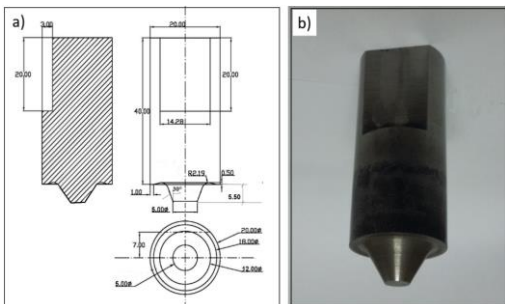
, (a) Design drawing of tungsten carbide tool, (b) An image of the tungsten carbide tool used
